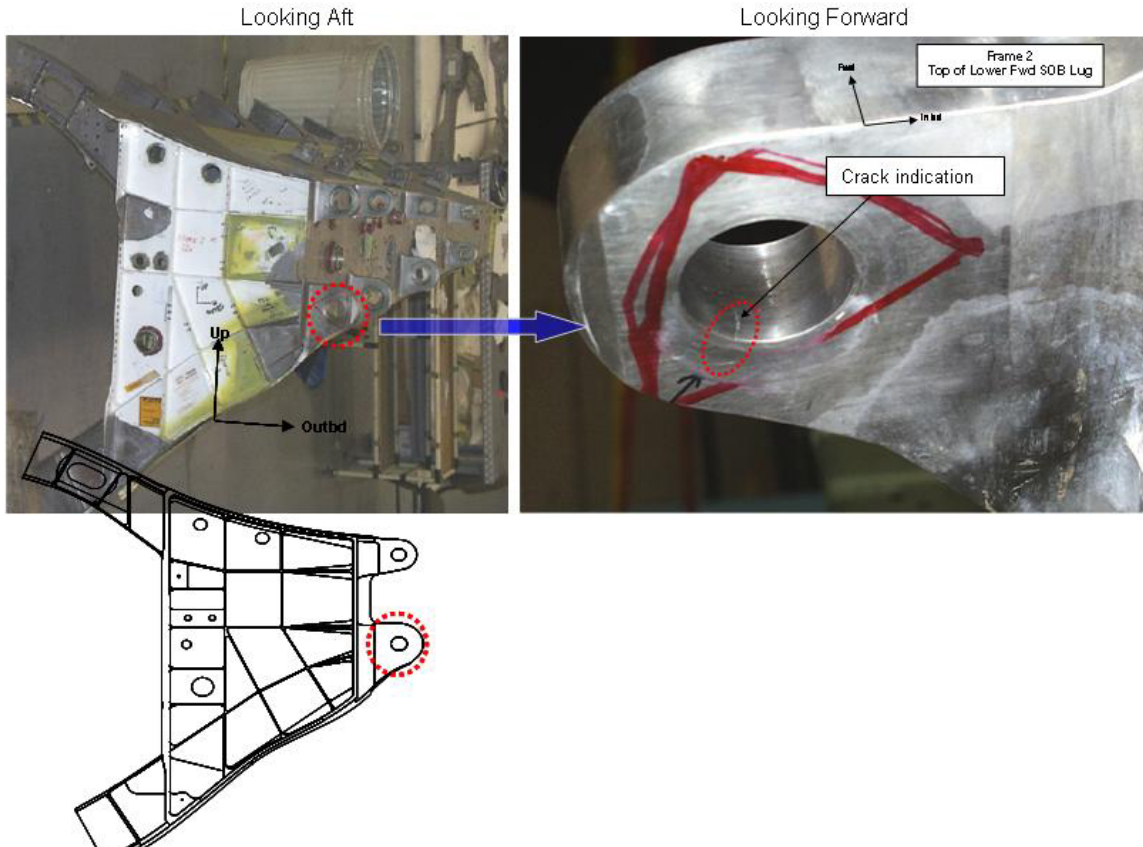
Location of cracking observed on lug bore, left hand side shown, smaller crack at similar location observed on right hand side.
